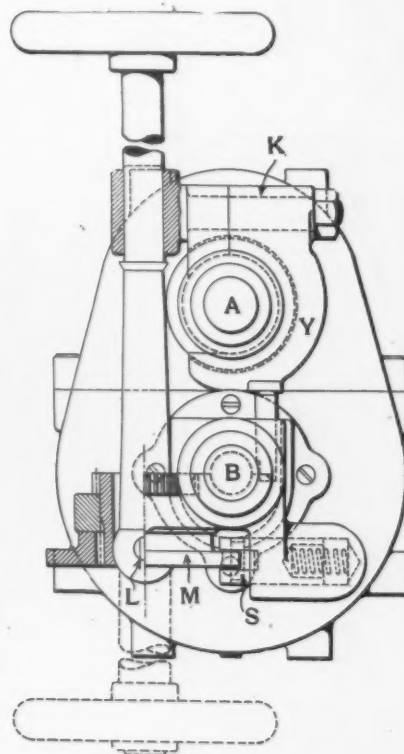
END ELEVATION SHOWING OPERATING HANDLE MECHANISM, AND PLUG ATTACHMENT, S.
